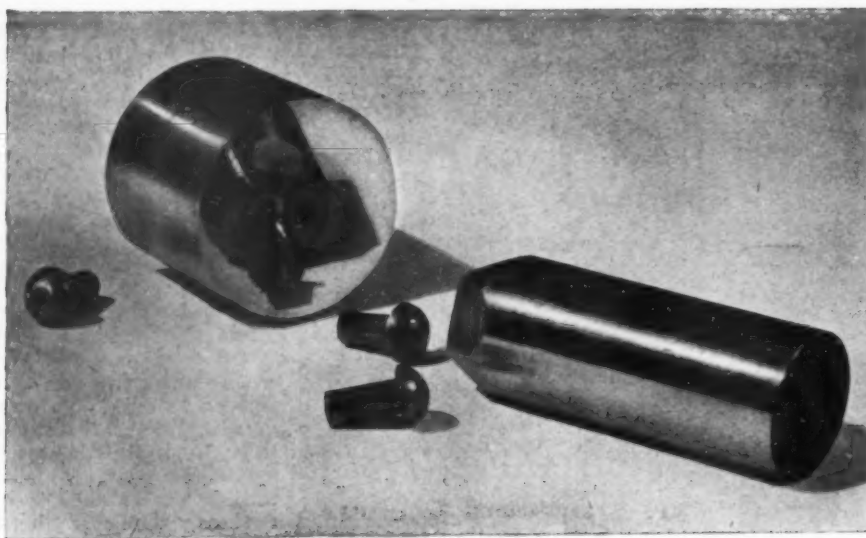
A hard metal hammer and heading die for making $\frac{3}{16}$ in. dia. rivets from aluminium and steel wire.
